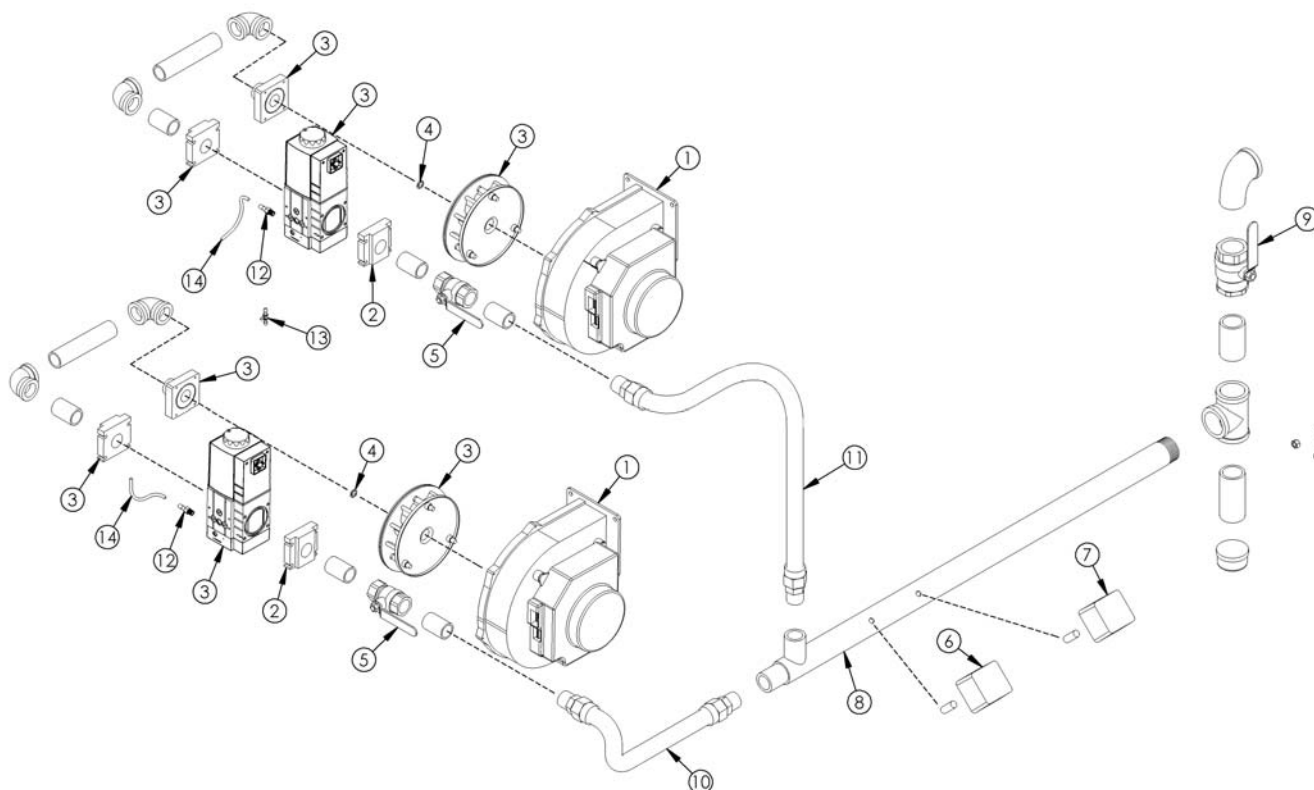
Blower Gas Train Assembly – PF-1500
